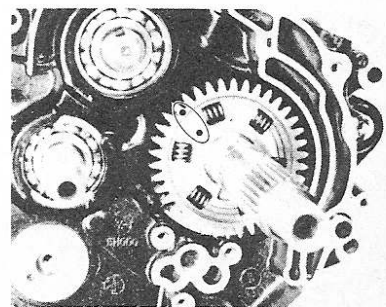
; key (2); buffer boss (3); punch mark (4)
